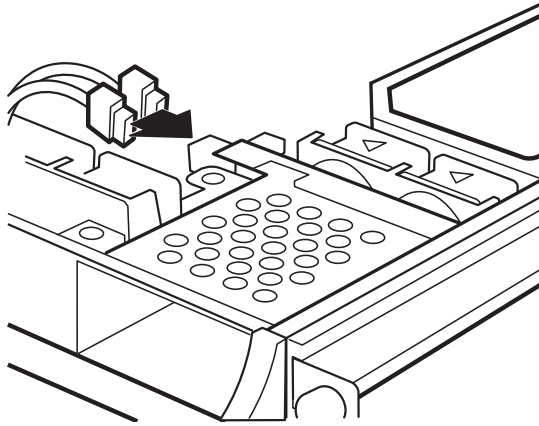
Connecting Cables to the SAS IF Assembly
